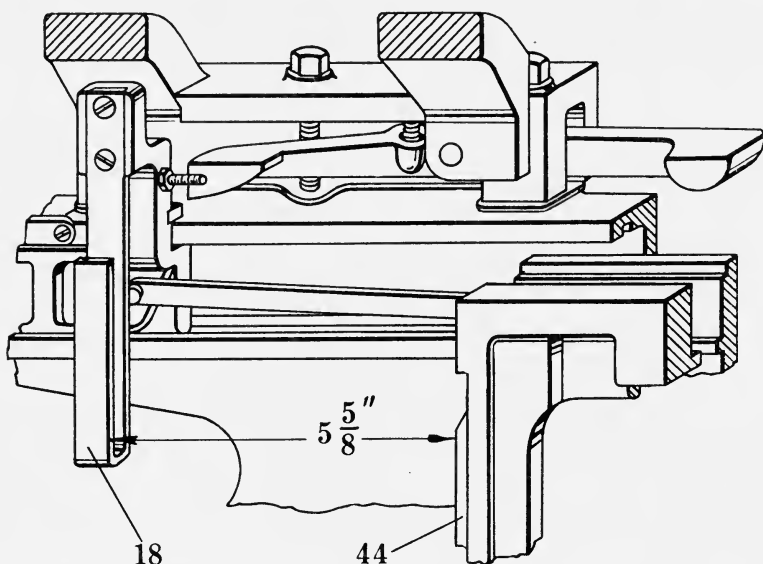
Elevator Transfer Slide Finger Adjustment. While the 30-em machine is standing at normal position, there should be $5 \frac{5}{8}''$ space between the right side of the finger 18 and the left side of the first elevator duplex rail return plate 44 at the left side of the transfer channel. This adjustment is made by moving the elevator transfer lever shaft cam roller arm 7, Fig. 113.
